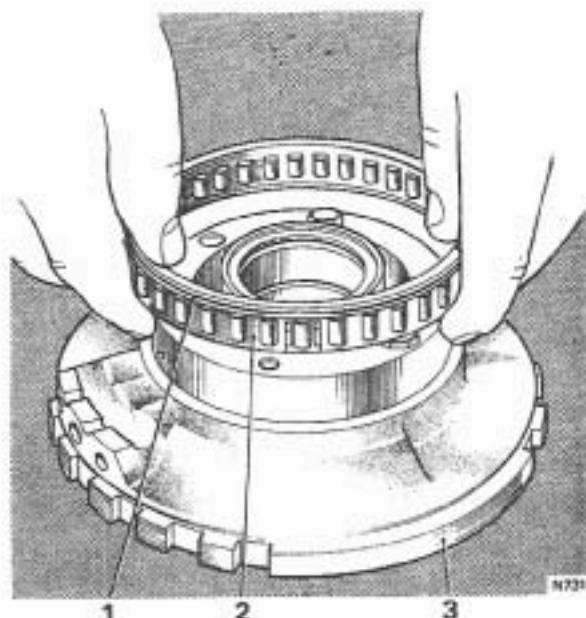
FITTING THE REAR SPRAG TO THE CENTRE SUPPORT (SPRAG CLUTCH)
